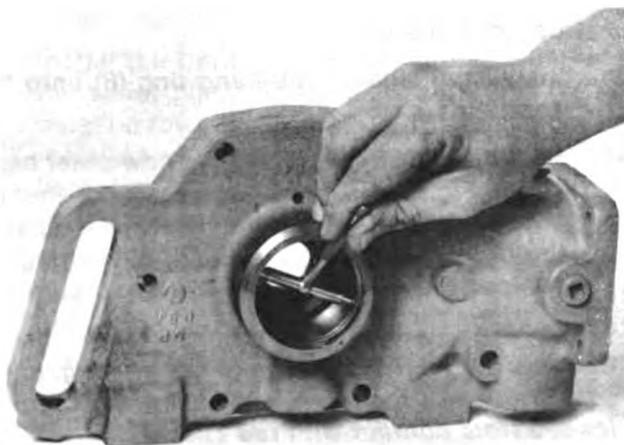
(N10884). Measure The Bore In The Housing.
